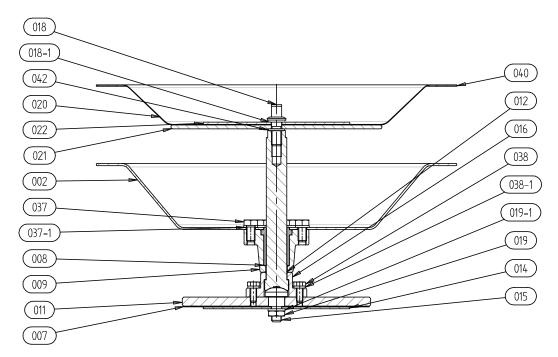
DISASEMBLY TRIM/MAIN VALVE
